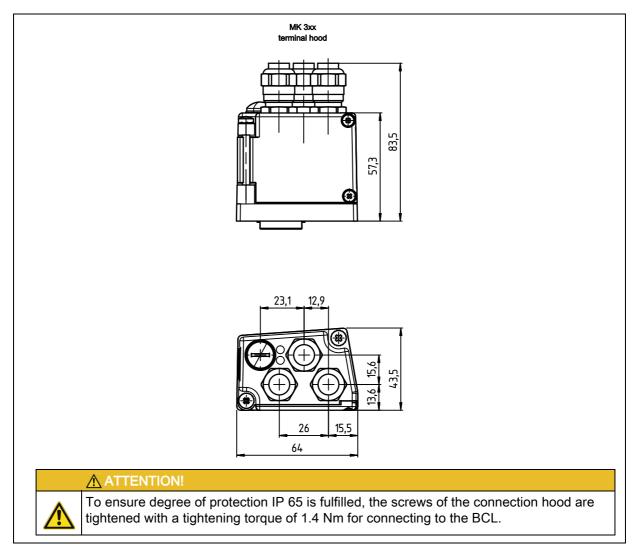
Dimensioned drawing of MK 3xx terminal hood
